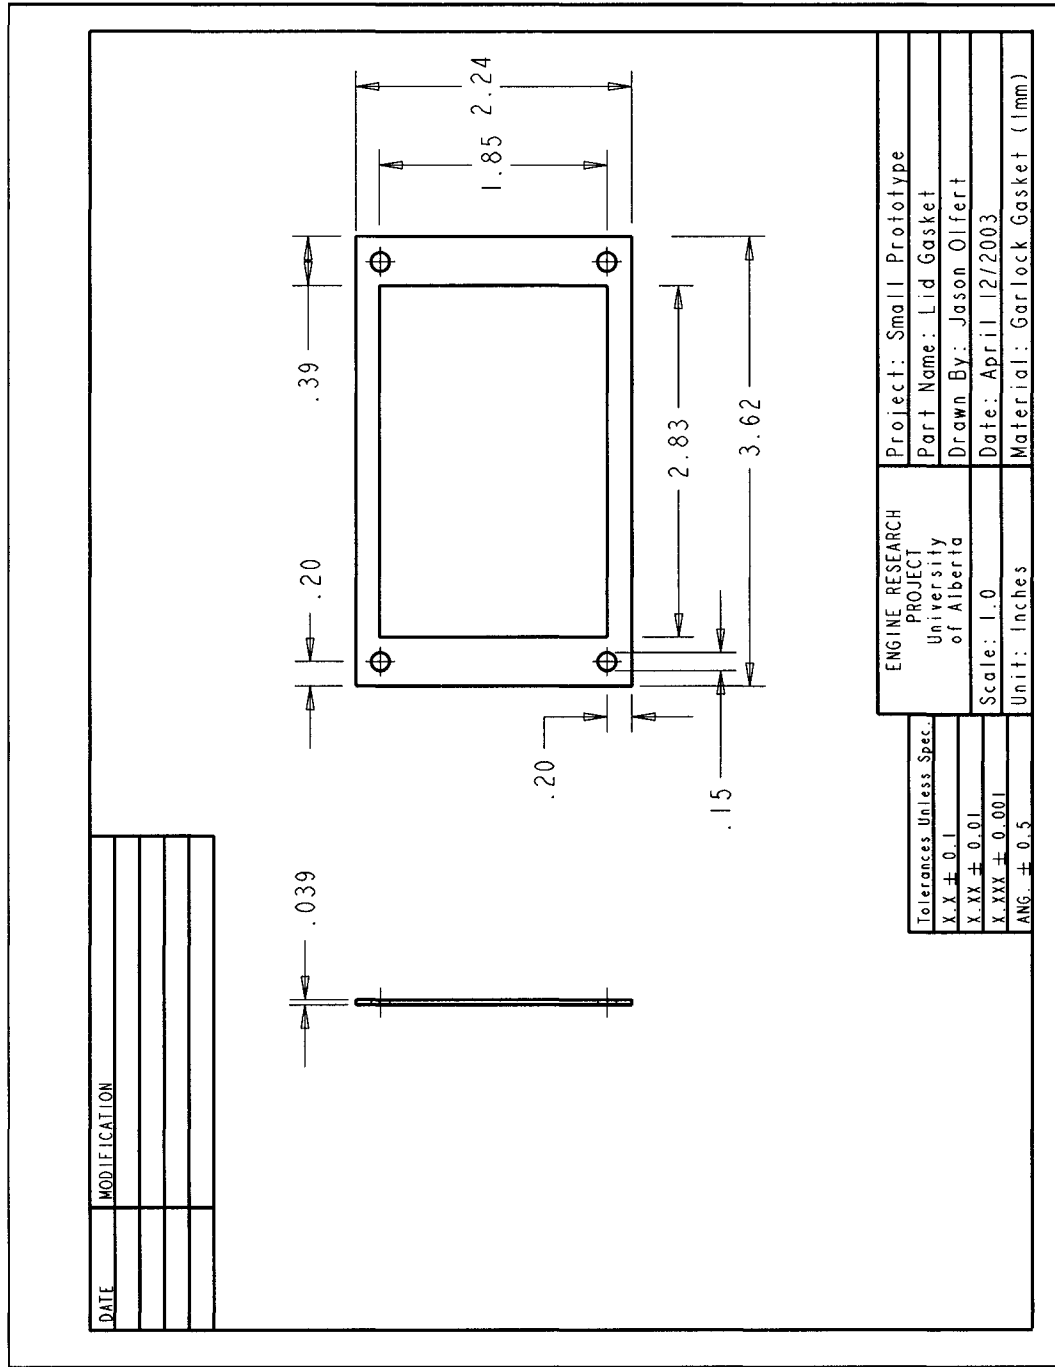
Drawing of Sensor Lid Gasket of Small Prototype
